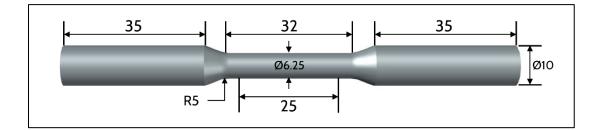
Geometry of tensile test sample (all dimensions in mm).
